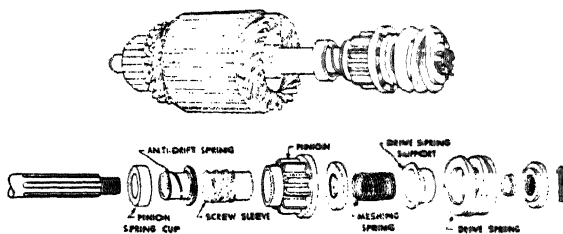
SPECIAL INBOARD-TYPE BENDIX DRIVE
